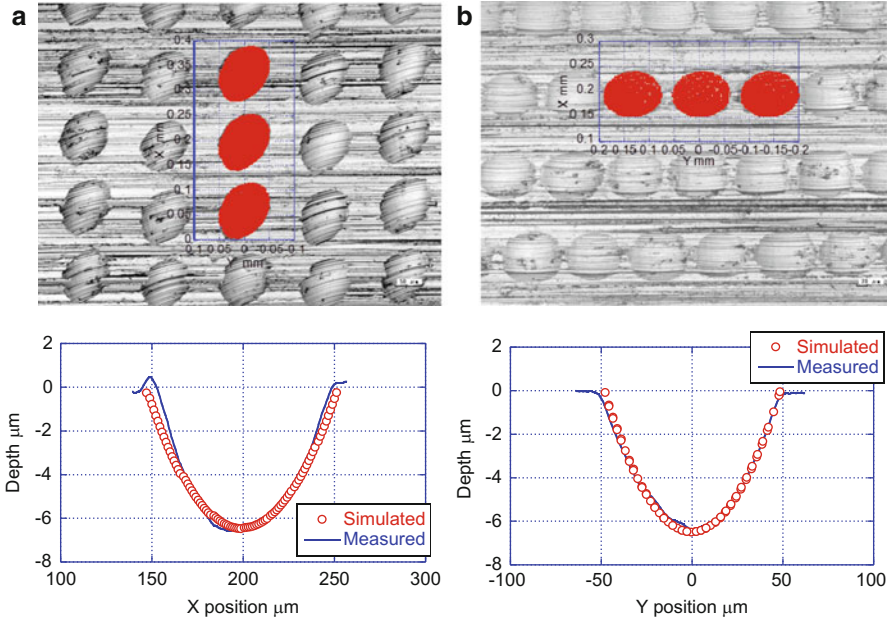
Dimple profiles on aluminum plates: (a) end mill is fed from bottom to top ($\varphi = 0$ in Fig. 31); (b) end mill is fed from left to right ($\varphi = -90$ in Fig. 31)
